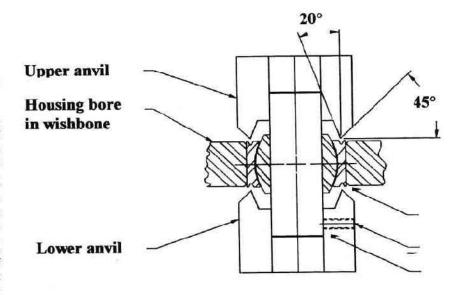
General arrangement of staking tools for swaging a grooved bearing
